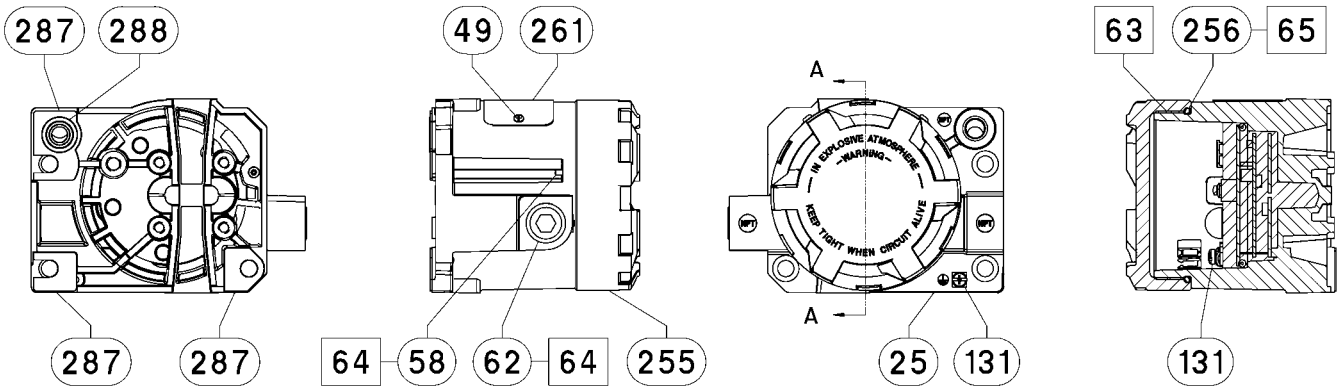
FIELDVUE DVC6205p Base Unit Housing Assembly (continued)
